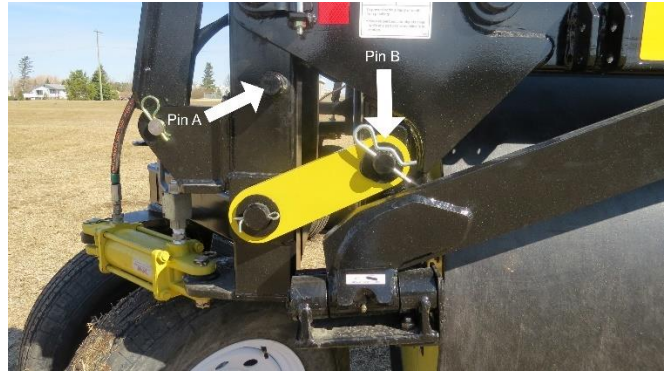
REAR WHEEL HEIGHT LOCKED POSITION
